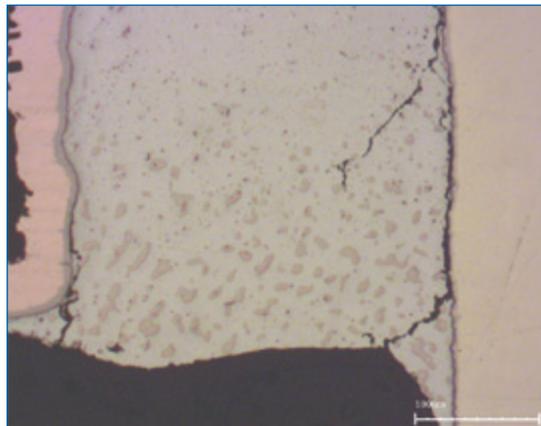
Microsection vertically through joint shown in Figure 5. Cracking and separation are seen in the bulk of the solder fillet and along the solder joint and plated through-hole interface.
